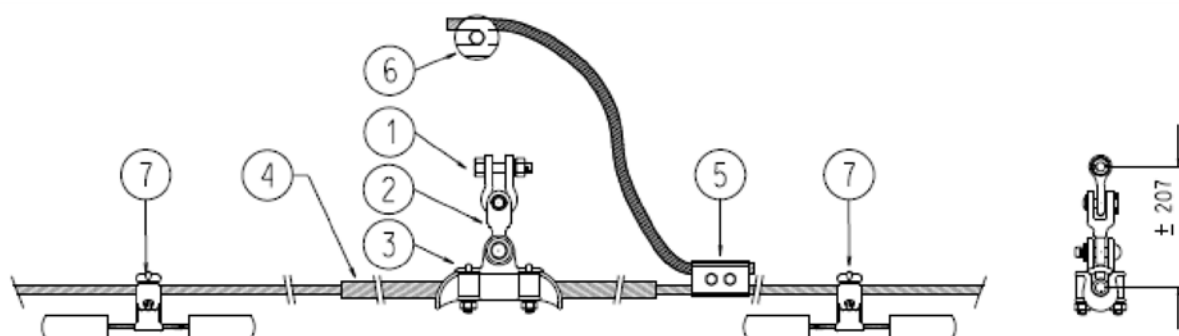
(Non-Insulated Option) Shield Wire Suspension Assembly for Single “Conductor”
